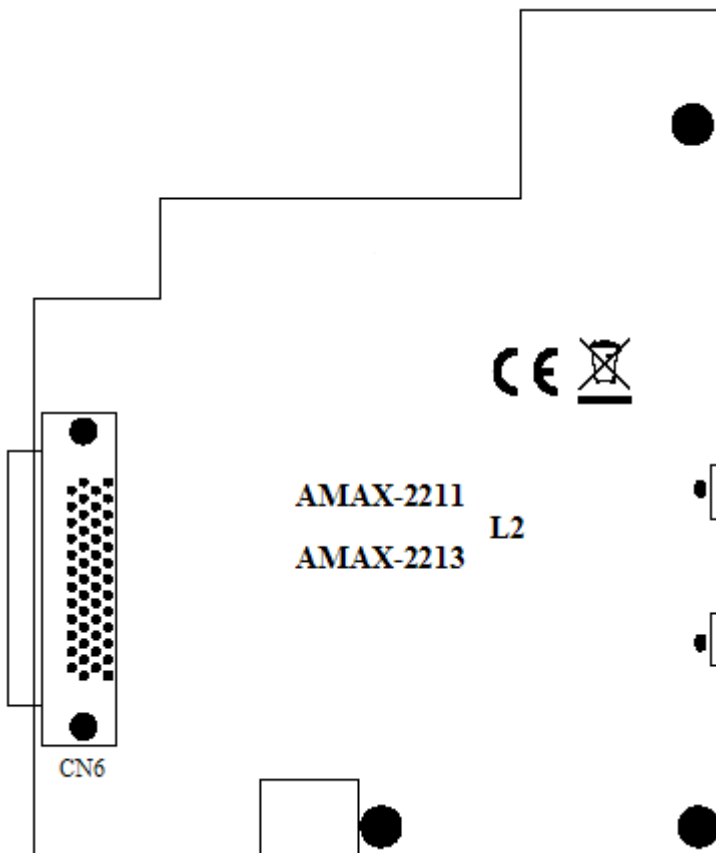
PCB Layout of the AMAX-2211/ 2213 L2
